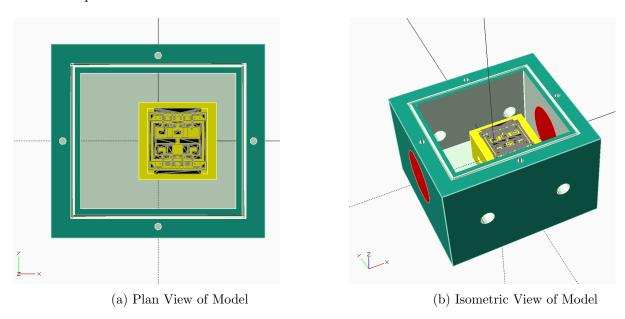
Showing plan and isometric view of the full OpenSCAD model
